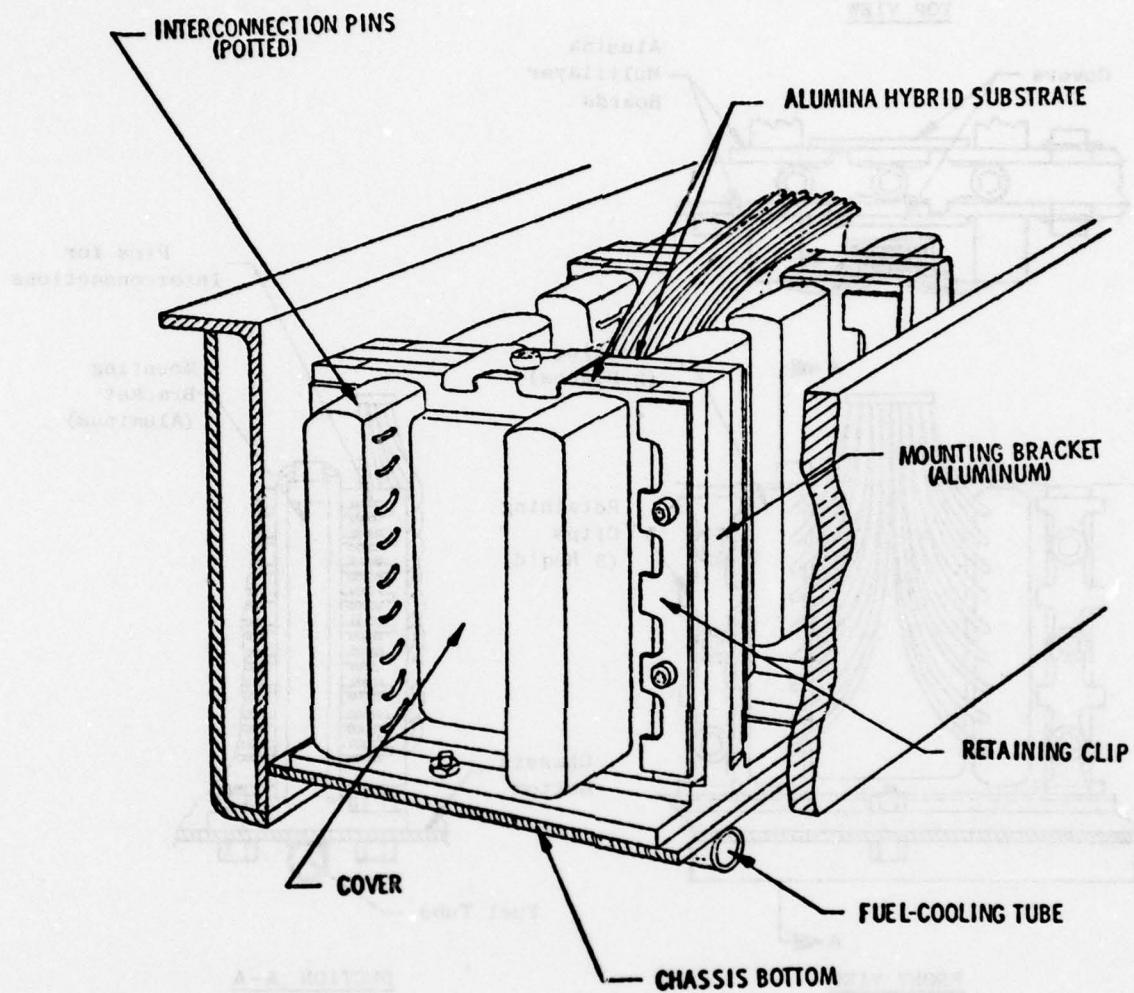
Electrical Control Cross Section Showing Hybrid Assembly Mounting Concept.
